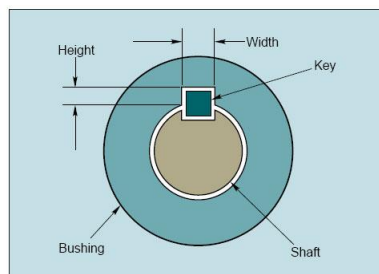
Key fits snugly between bushing and shaft to lock them together radially.
